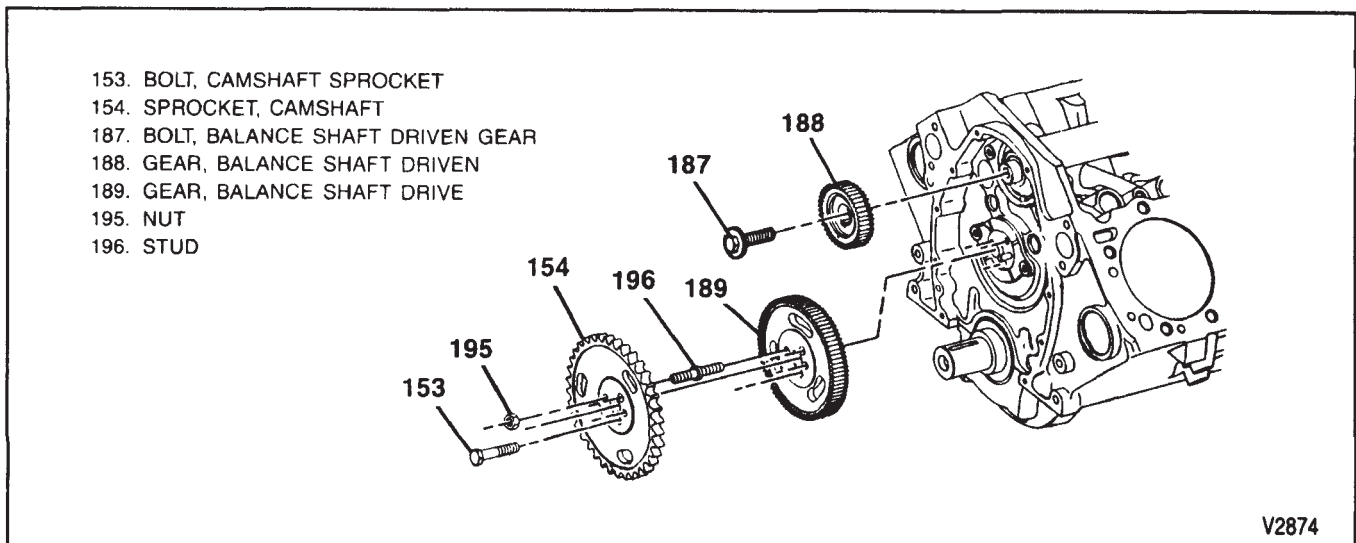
Balance Shaft Drive and Driven Gears (VIN W Engine)
